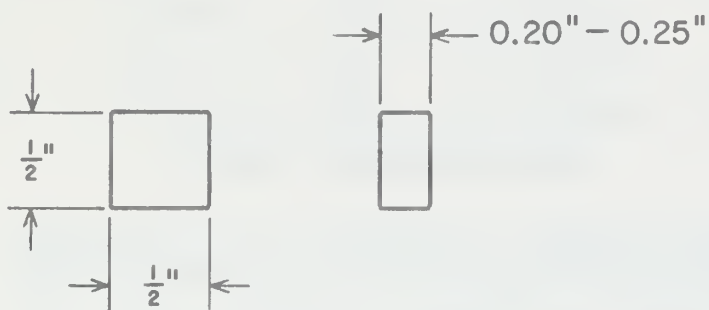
UNIAXIAL COMPRESSIVE SPECIMEN.
